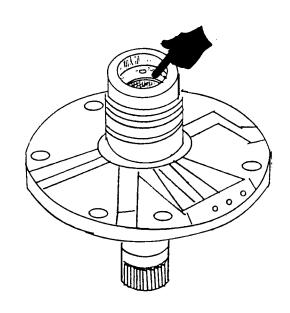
Remove or Install Reaction Shaft Support Bolts
